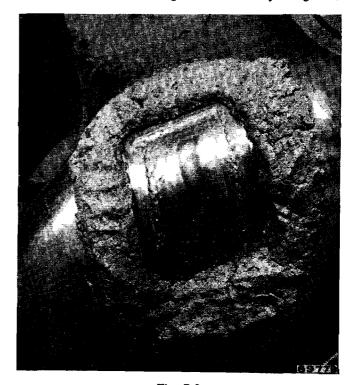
Surround the joint with wet asbestos to prevent buckling during welding
